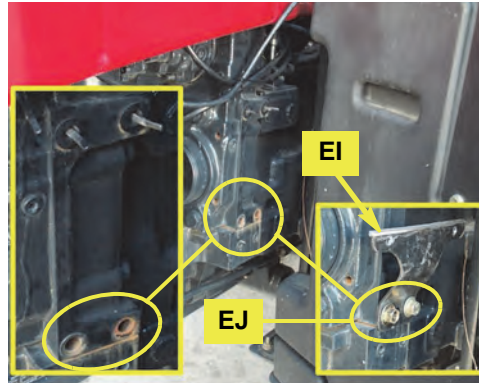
with insets: Steering controller mounting location and (right inset) bracket installed (prototype bracket shown)
